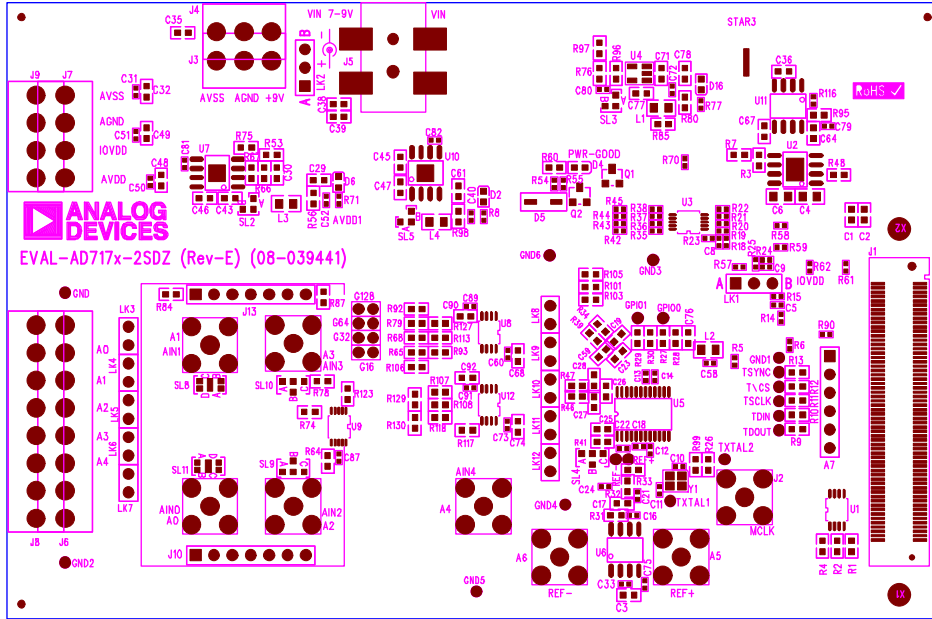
Top Printed Circuit Board (PCB) Silkscreen
